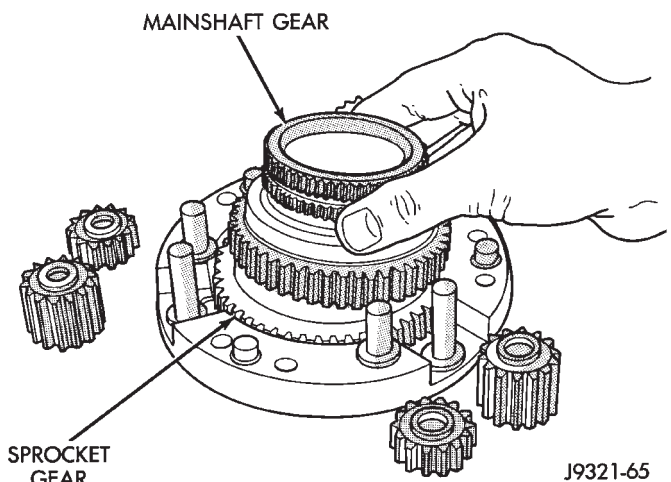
Sprocket Gear And Thrust Washer Installation
